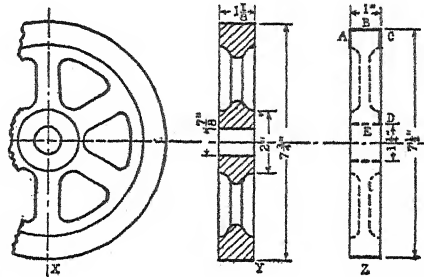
The Gray-Cast-Iron Gear Blank Machined in the Following Illustrative Setup.
